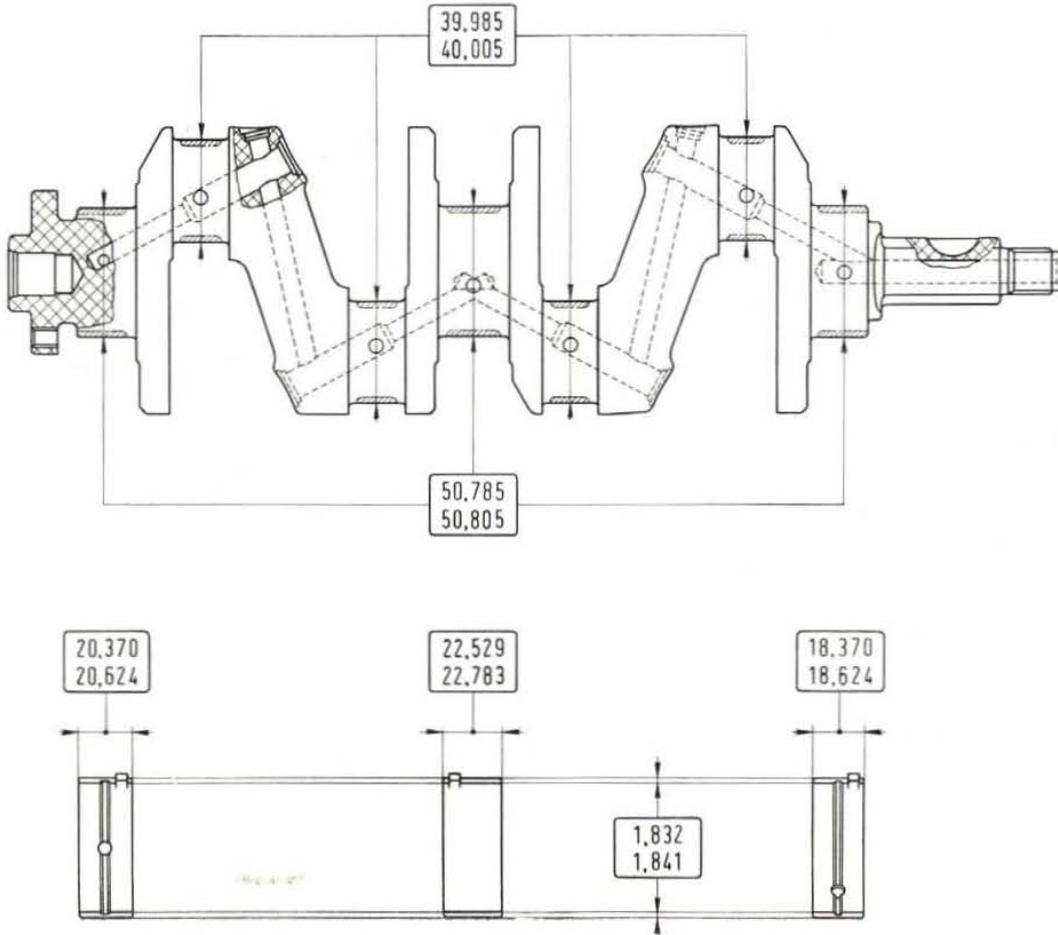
Critical dimensions (metric) of crankshaft and main bearing inserts.
